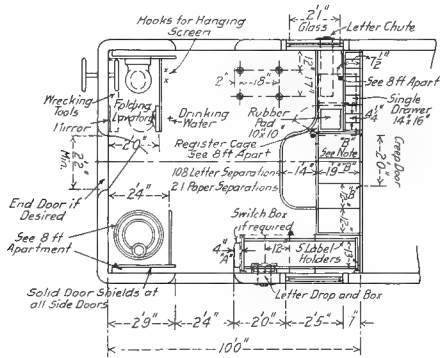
Floor Plan of 10 ft. Mail Apartment.
